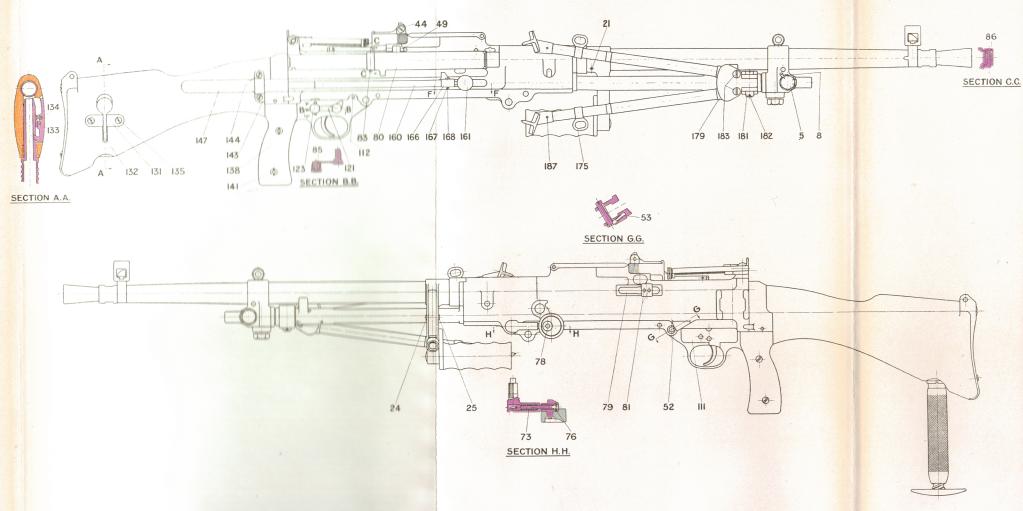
General Arrangement of the Gun. (Sheet 2)
